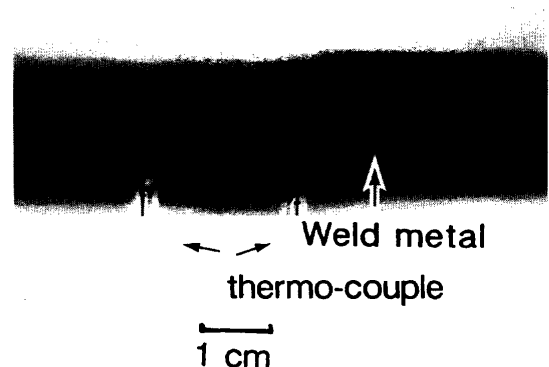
X-ray photograph of welded steel plate with thermocouples.
